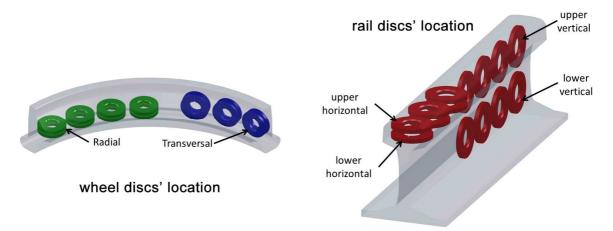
Location of disc specimens extraction on the wheel and on the rail.
